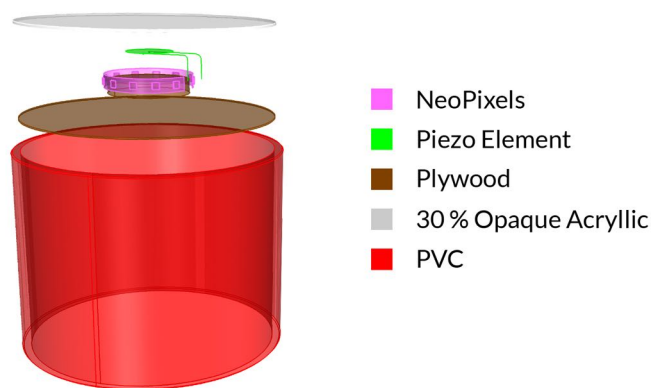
An exploded view of a drum, with each of the components used in the setup.
